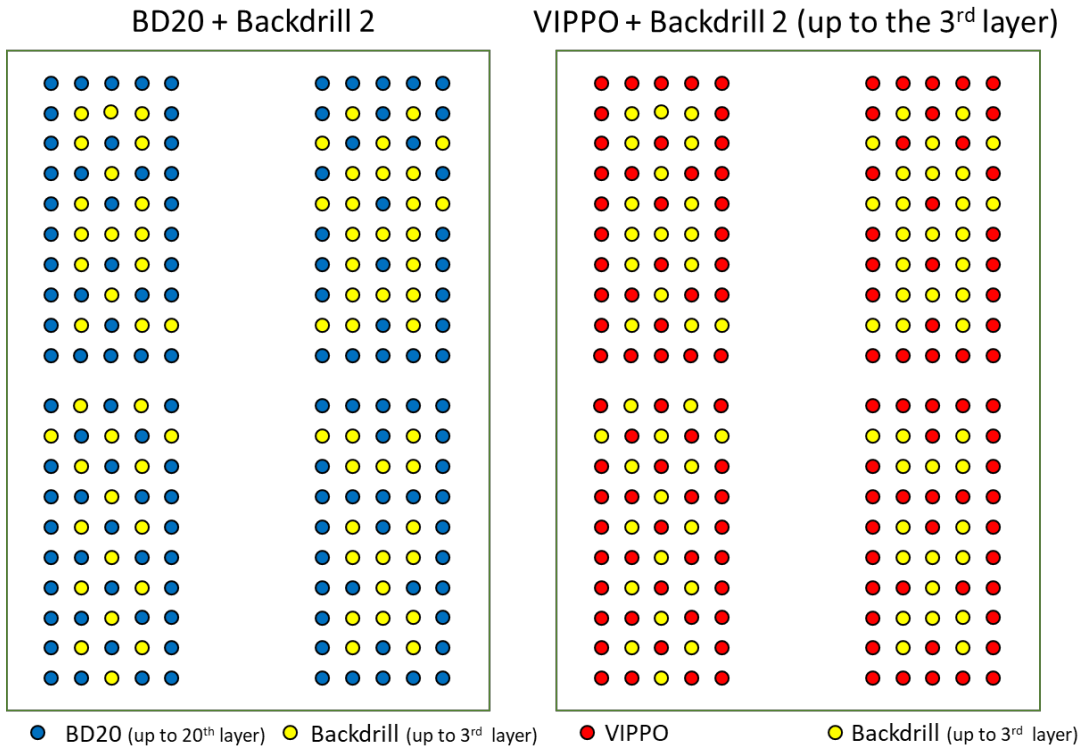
Distribution of each solder joint's PCB connection for the BD20+Backdrill 2 and VIPPO + Backdrill 2 PCB structures
